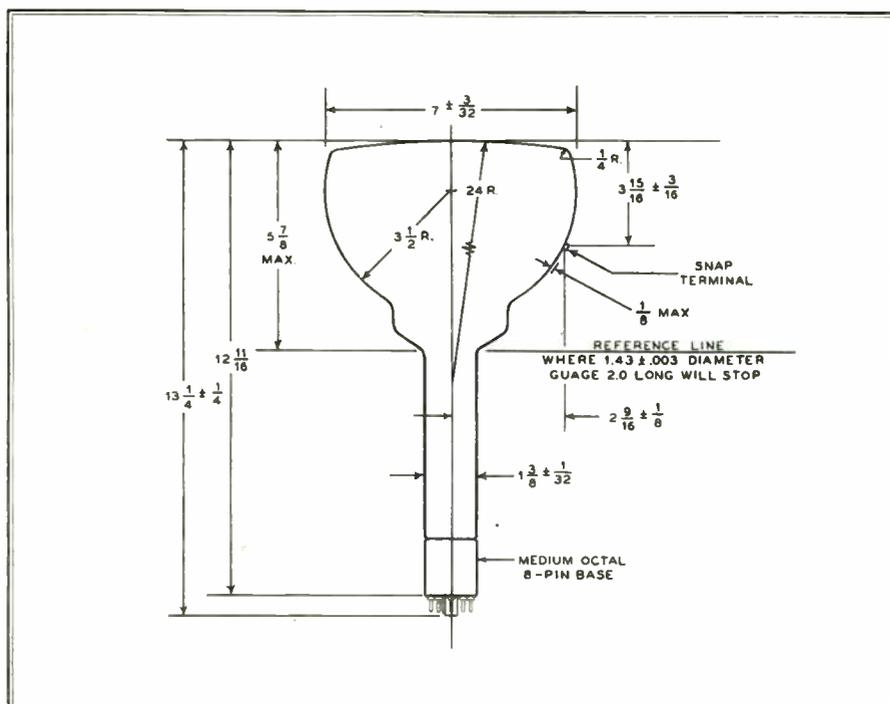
TYPICAL MAGNETIC TYPE TUBE, SHOWING DIMENSIONS IN INCHES
